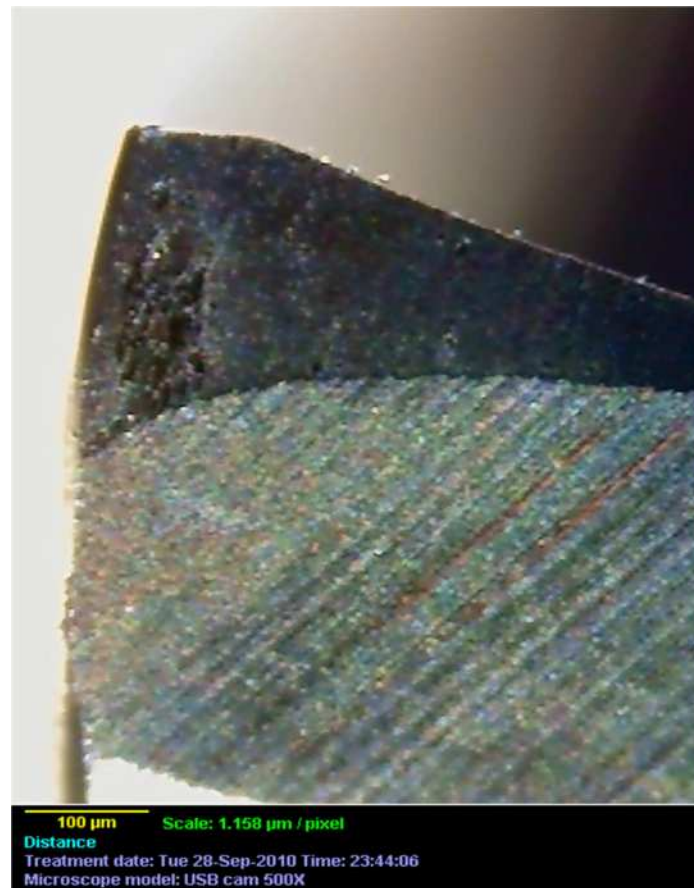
Worn-out Tool (The Wear = 320 μm)
